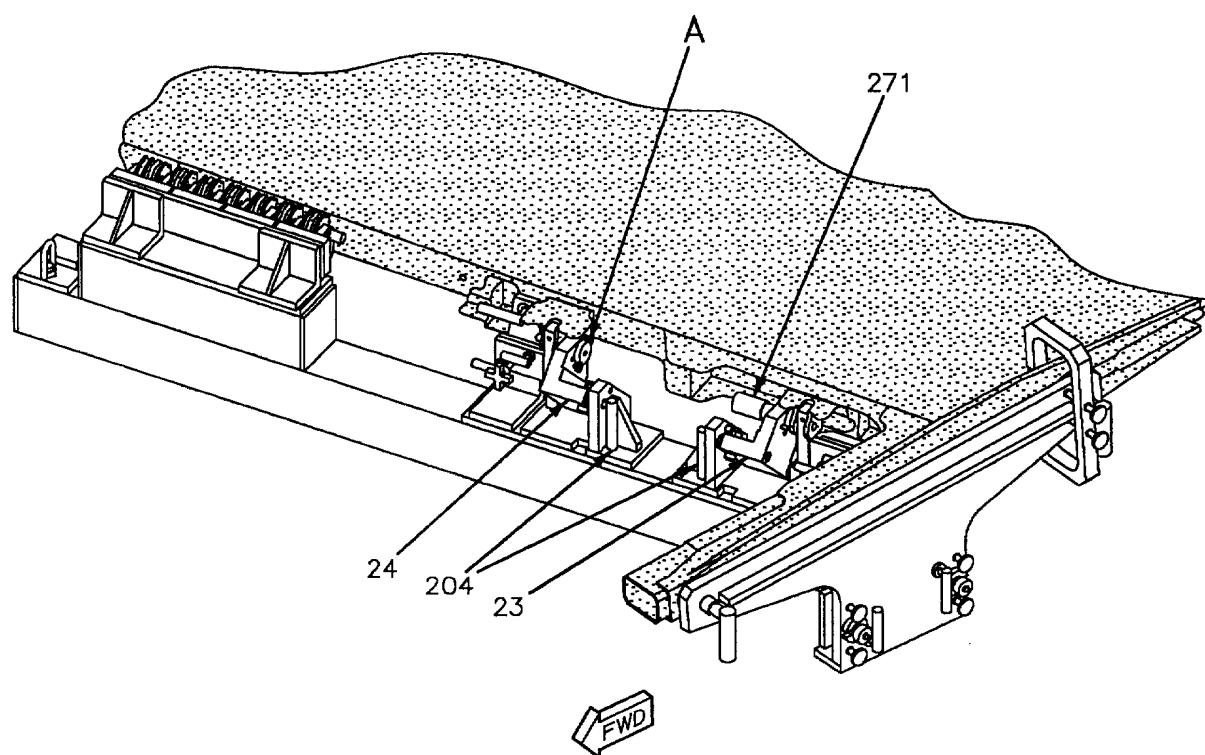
Drilling Holes in Hinge Halves, 74A150678 and 74A150679 (Sheet 1)
